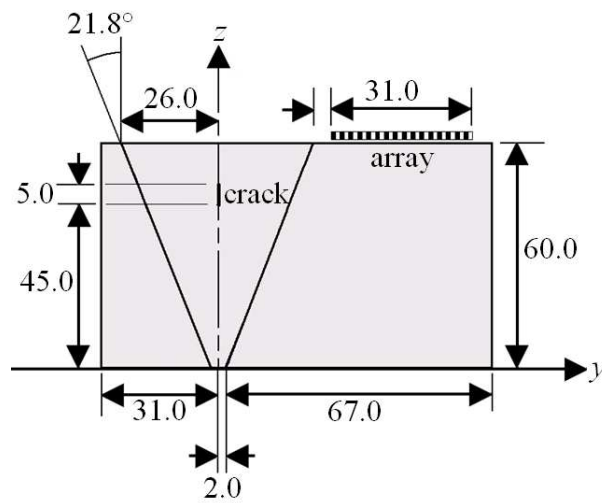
Geometry for the imaging of a crack-like defect whose ends are at (0,45)mm and (0,50)mm, using full-skip LT.TL inspection. Dimensions in mm.
